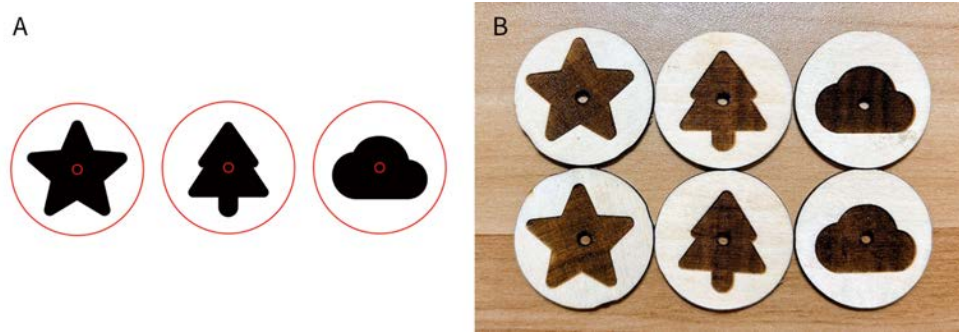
Design of Prototype III Part 2. A: Laser Cutting Design.(red lines for cutting, black areas for engraving). B: Samples after laser cutting.
